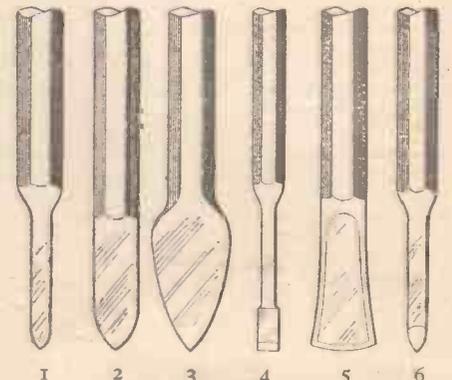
Further types of chisel. 1, chisel for general use; 2, chisel with cutting edge slightly circular; 3, side view of 2; 4, diamond-point chisel as shown at 5 (Fig. 12); 5, chisel for cutting oil-grooves in bearings; 6, side view of 5.
